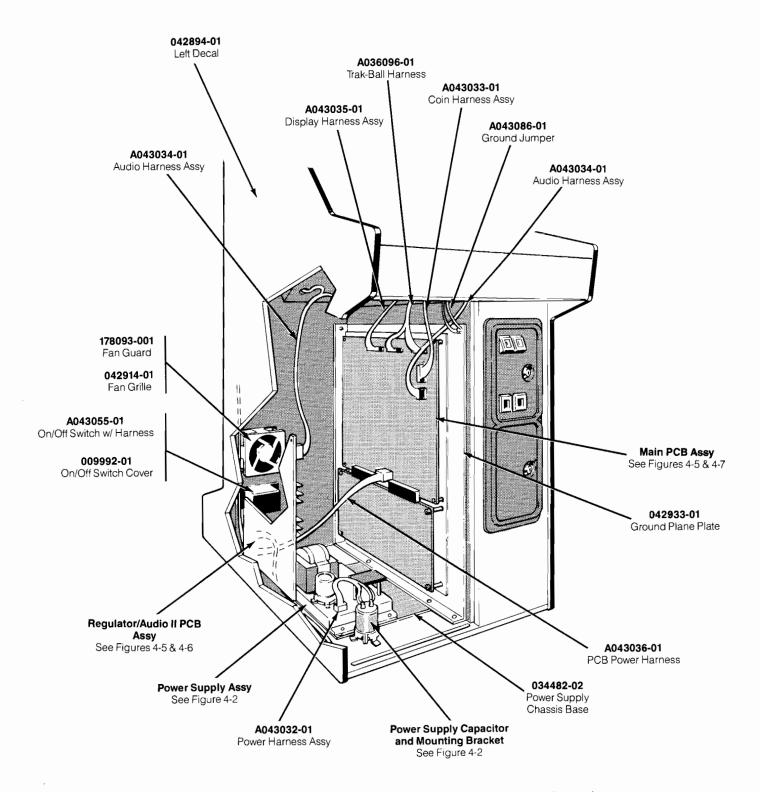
Cabinet-Mounted Assemblies, continued A042880-01 A
